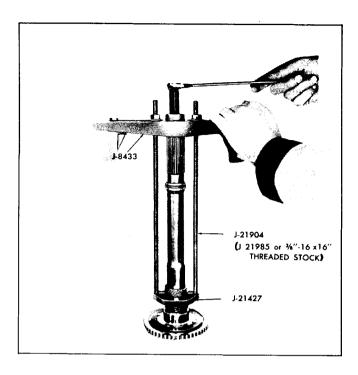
E-87 Removing Steel Speedometer Drive Gear
